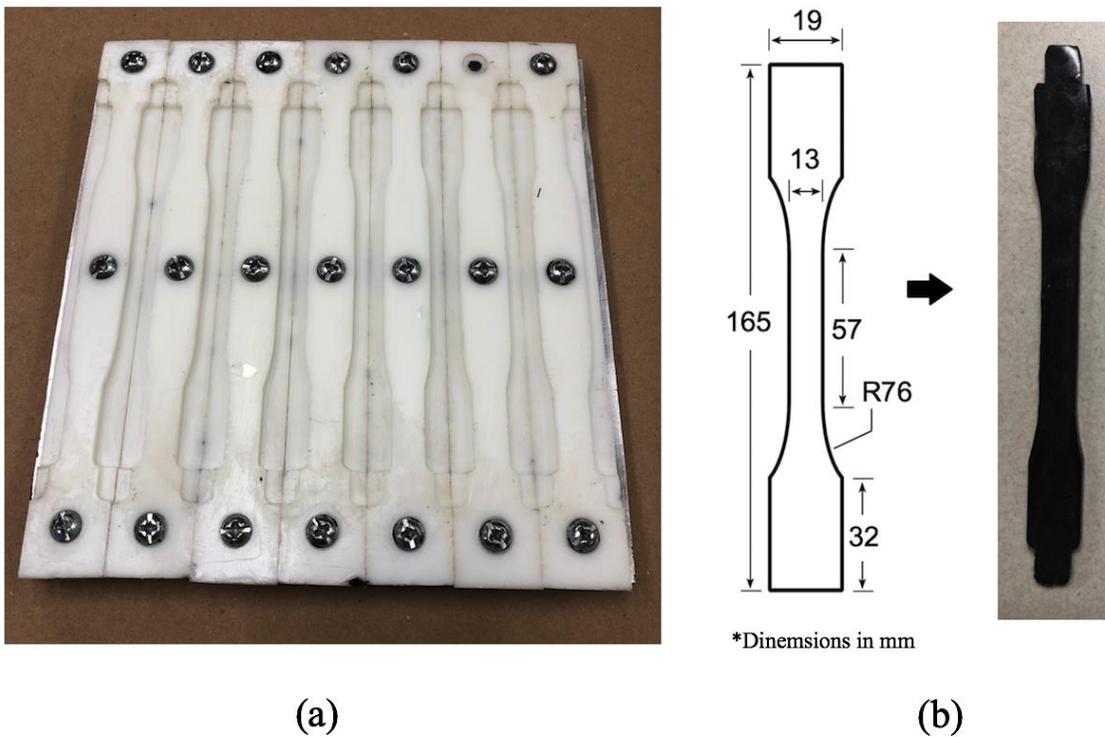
(a) Tensile test specimen molds, (b) dimensions of the test specimens
